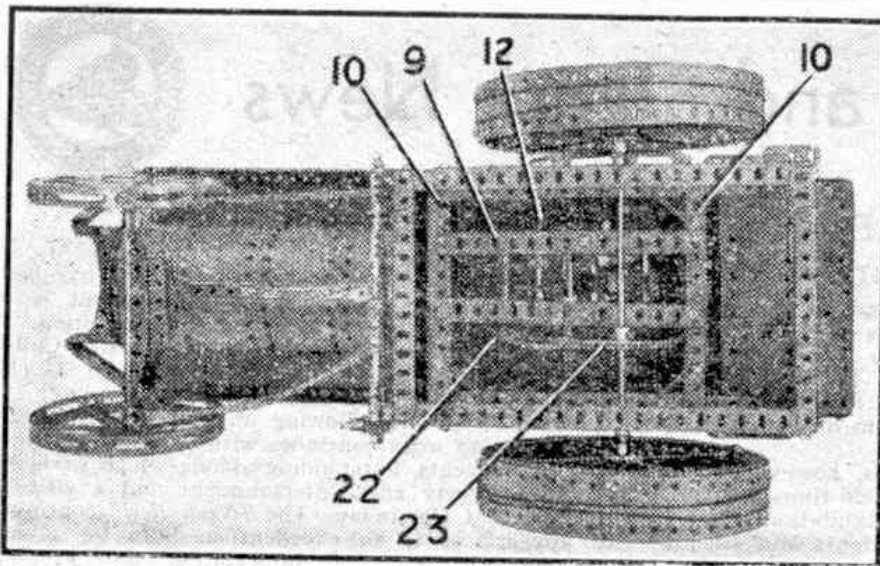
An underneath view of the tractor showing the Motor unit in position and the drive to the rear axle.
